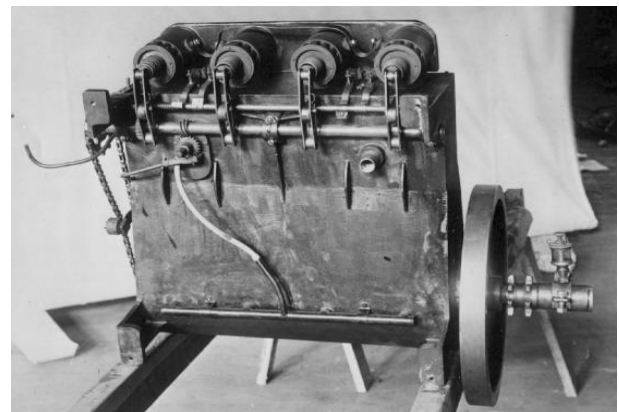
1903 Wright Engine Showing Underside Portion as Well as Oil Pump and Camshaft [46].
